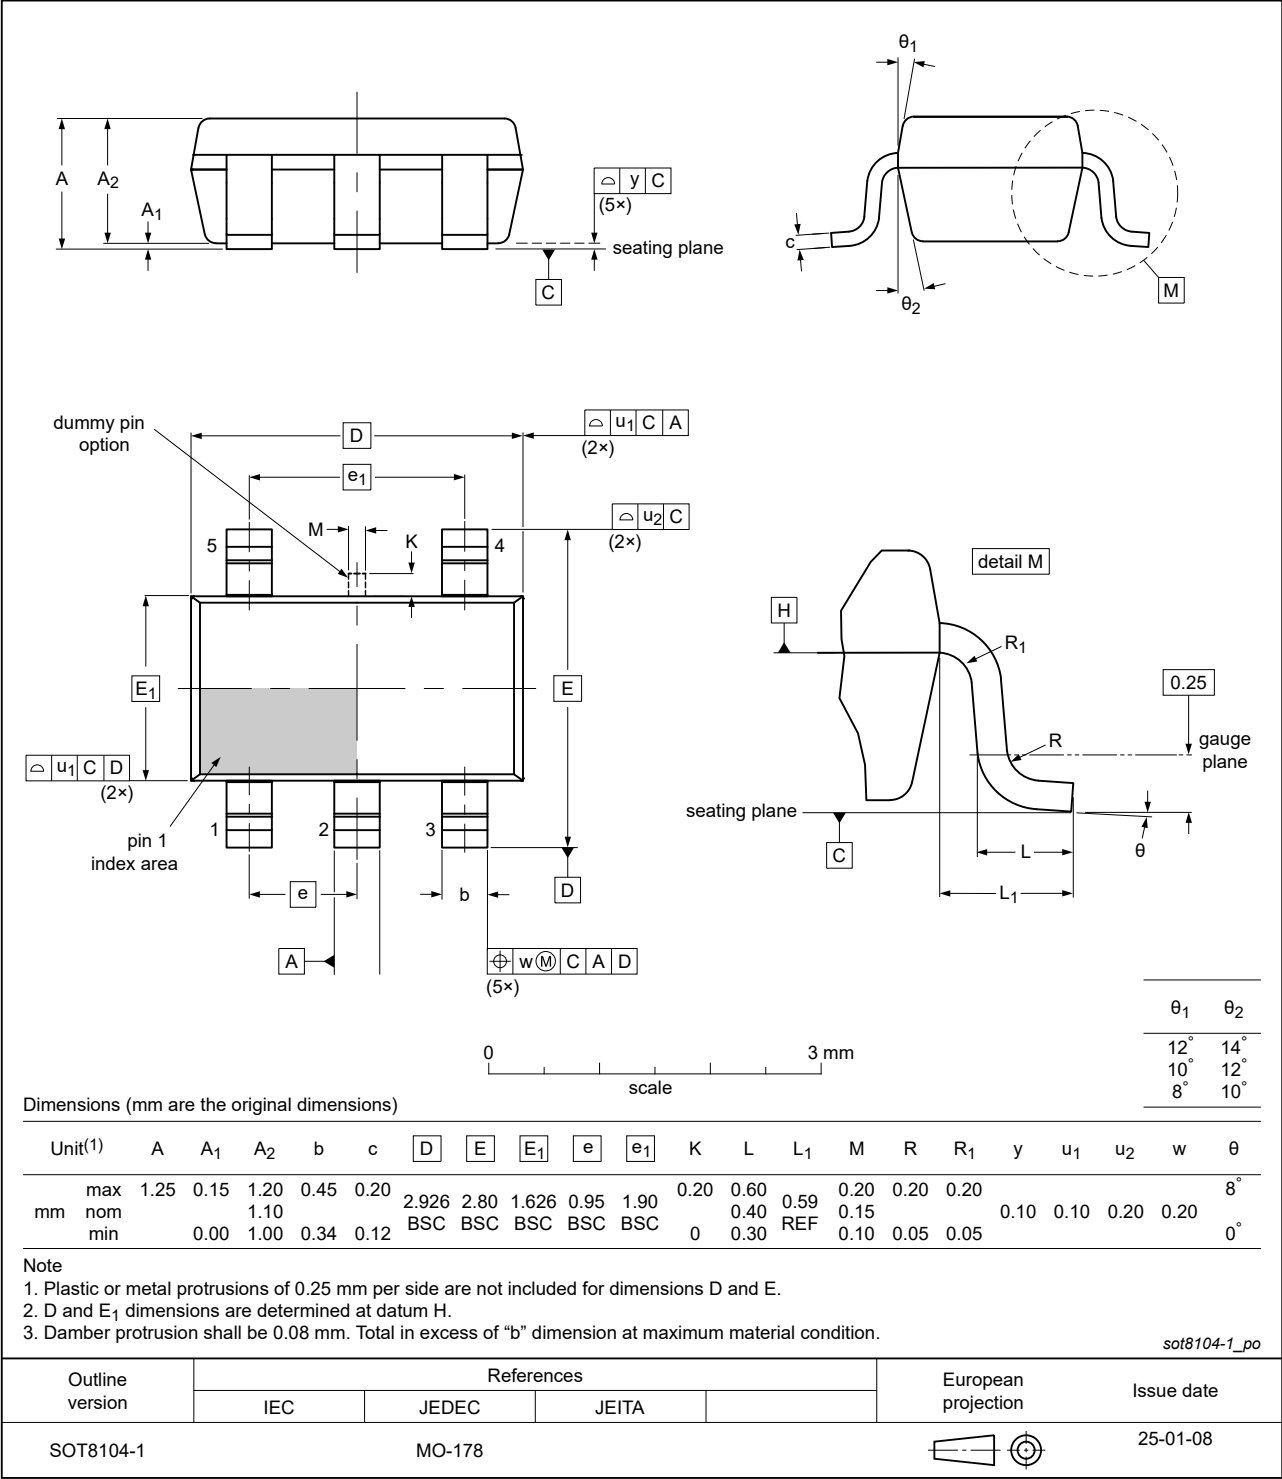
Package outline SOT8104-1 (SOT23-5)
